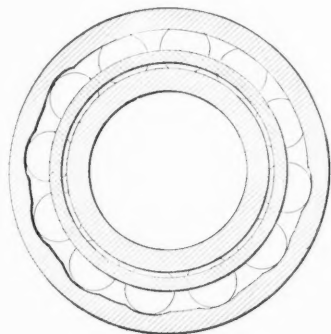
Bearing with Outer Ring Grooved to permit the Use of a One-piece Separator
